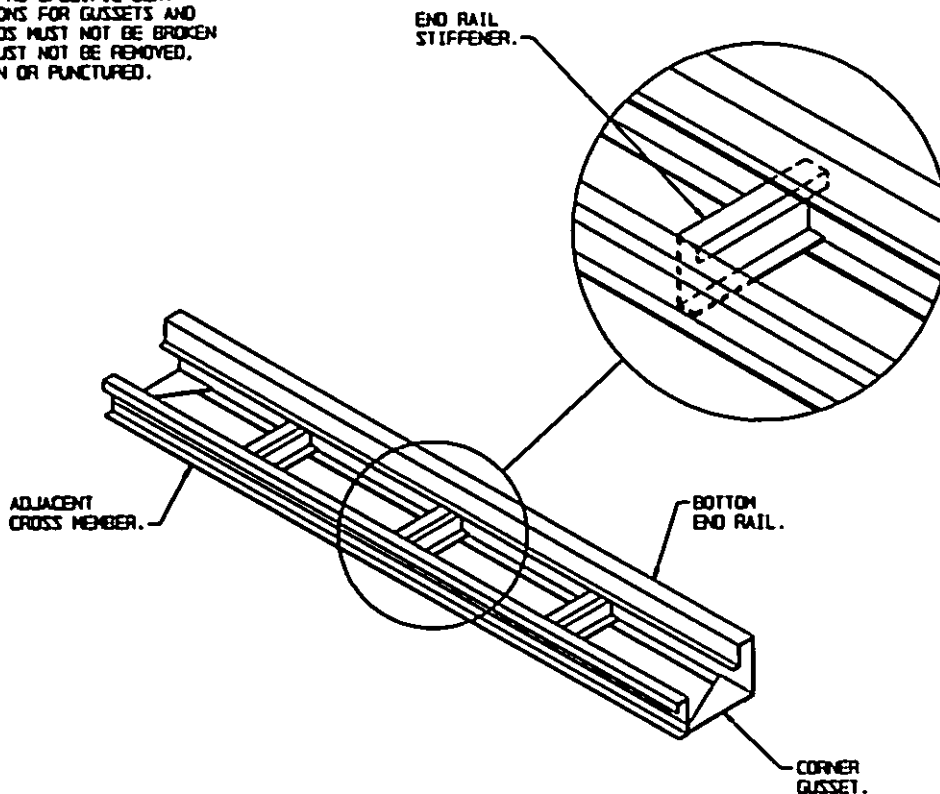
D - BOTTOM END RAIL (MILVAN)
